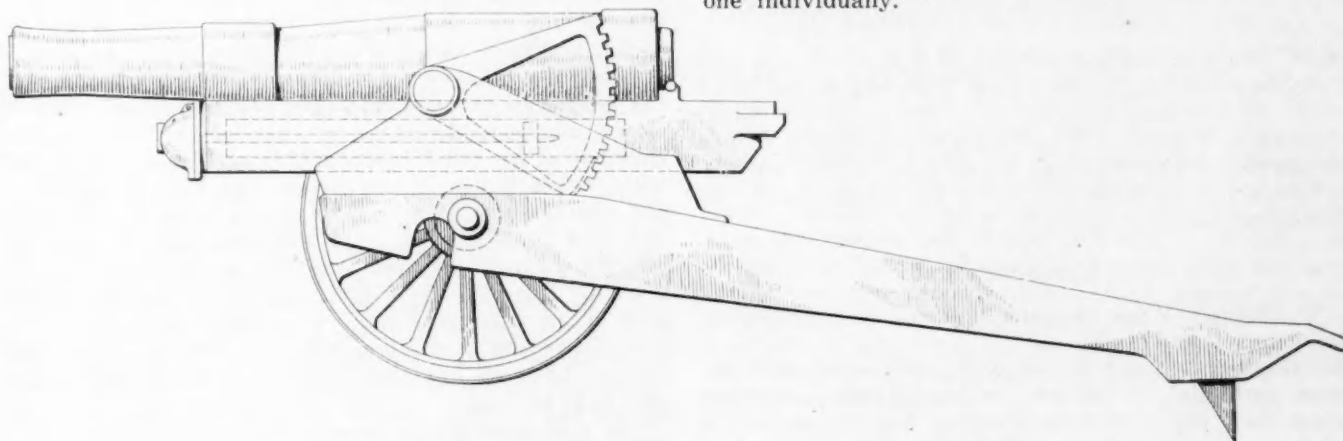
SHOWING THE COMPONENT PARTS OF A RECOIL TYPE OF GUN
